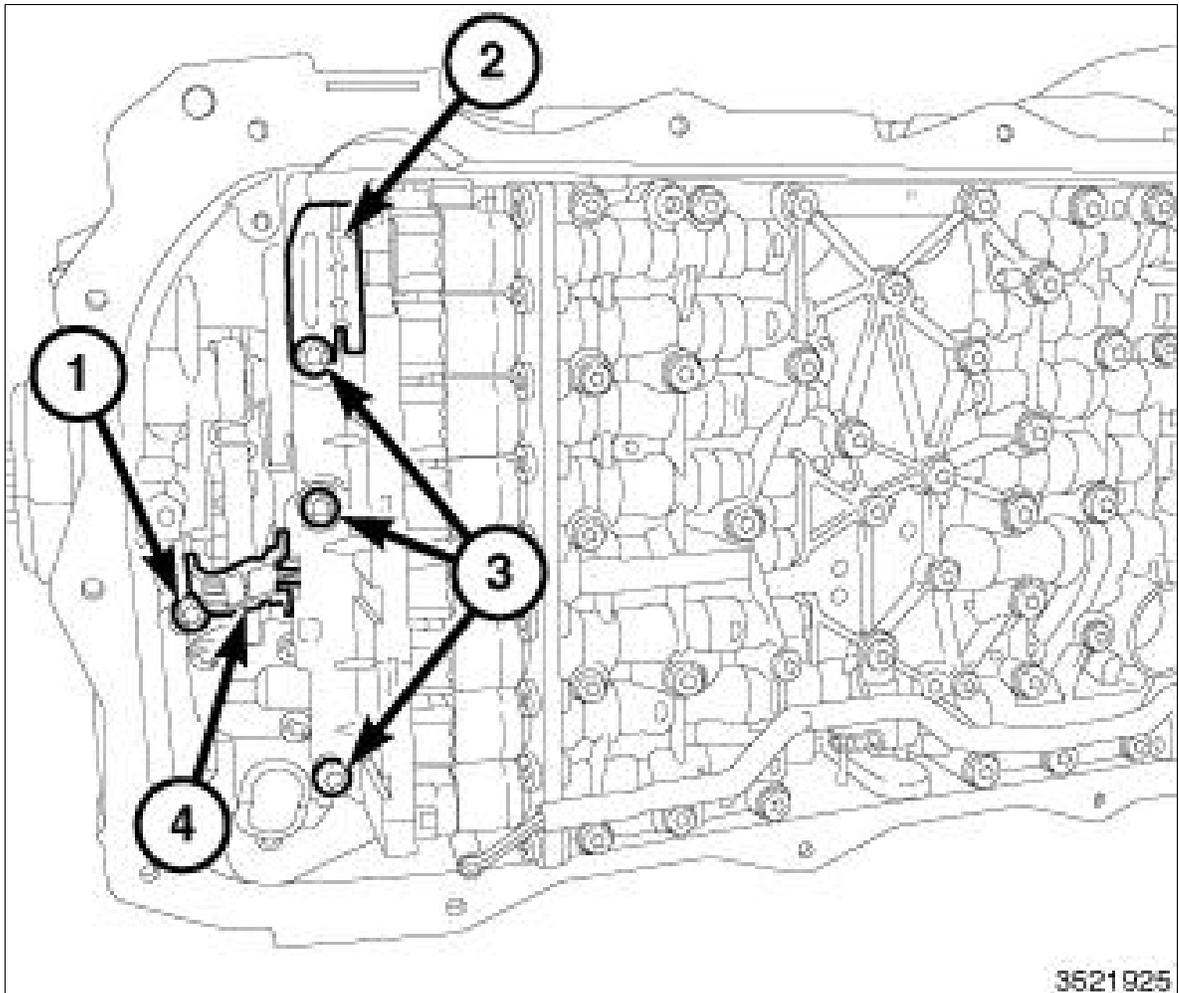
Remover/Installer, Guide Sleeve, Electrical Harness Insulator & Transmission Case
